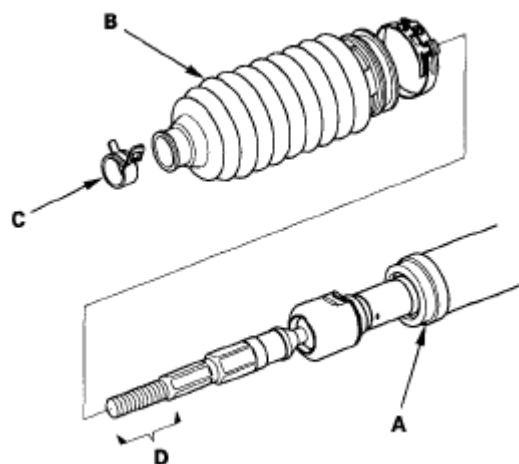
Identifying Multipurpose Grease To Circumference Of Rack End Joint Housing (A) And Lock Washer
